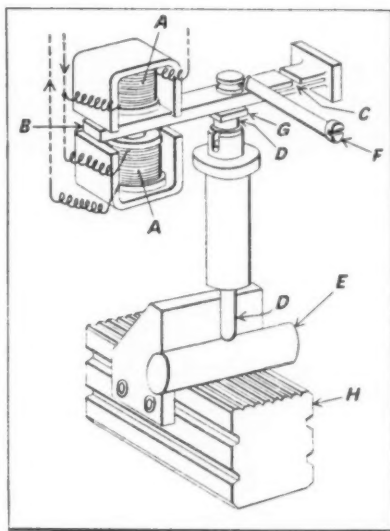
Arrangement of Electro-magnetic Gage for Dimensional Inspection of External Diameters
